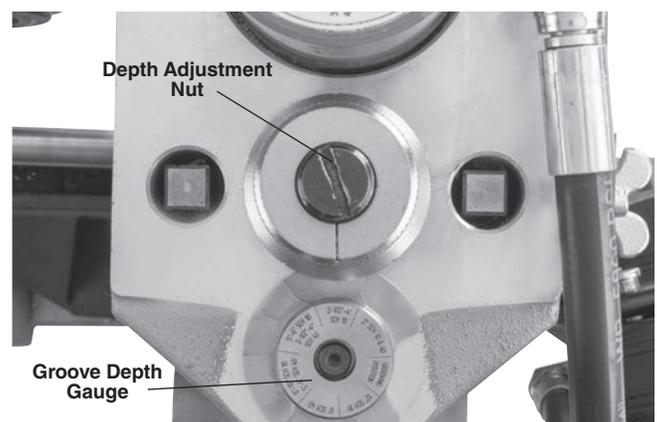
A – Place Correct Step of Gauge Under Adjusting Head
